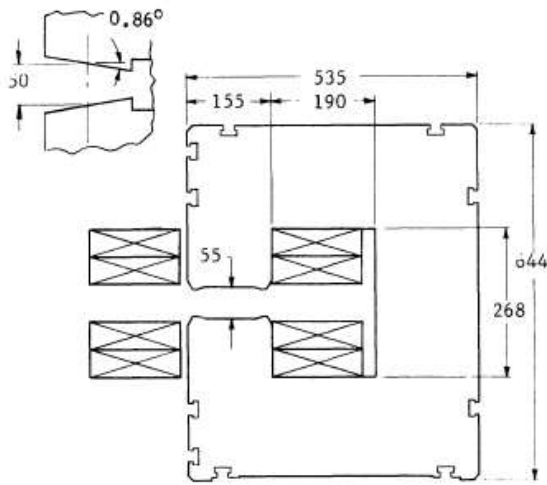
Side view of a VUV storage ring bending dipole [1].
